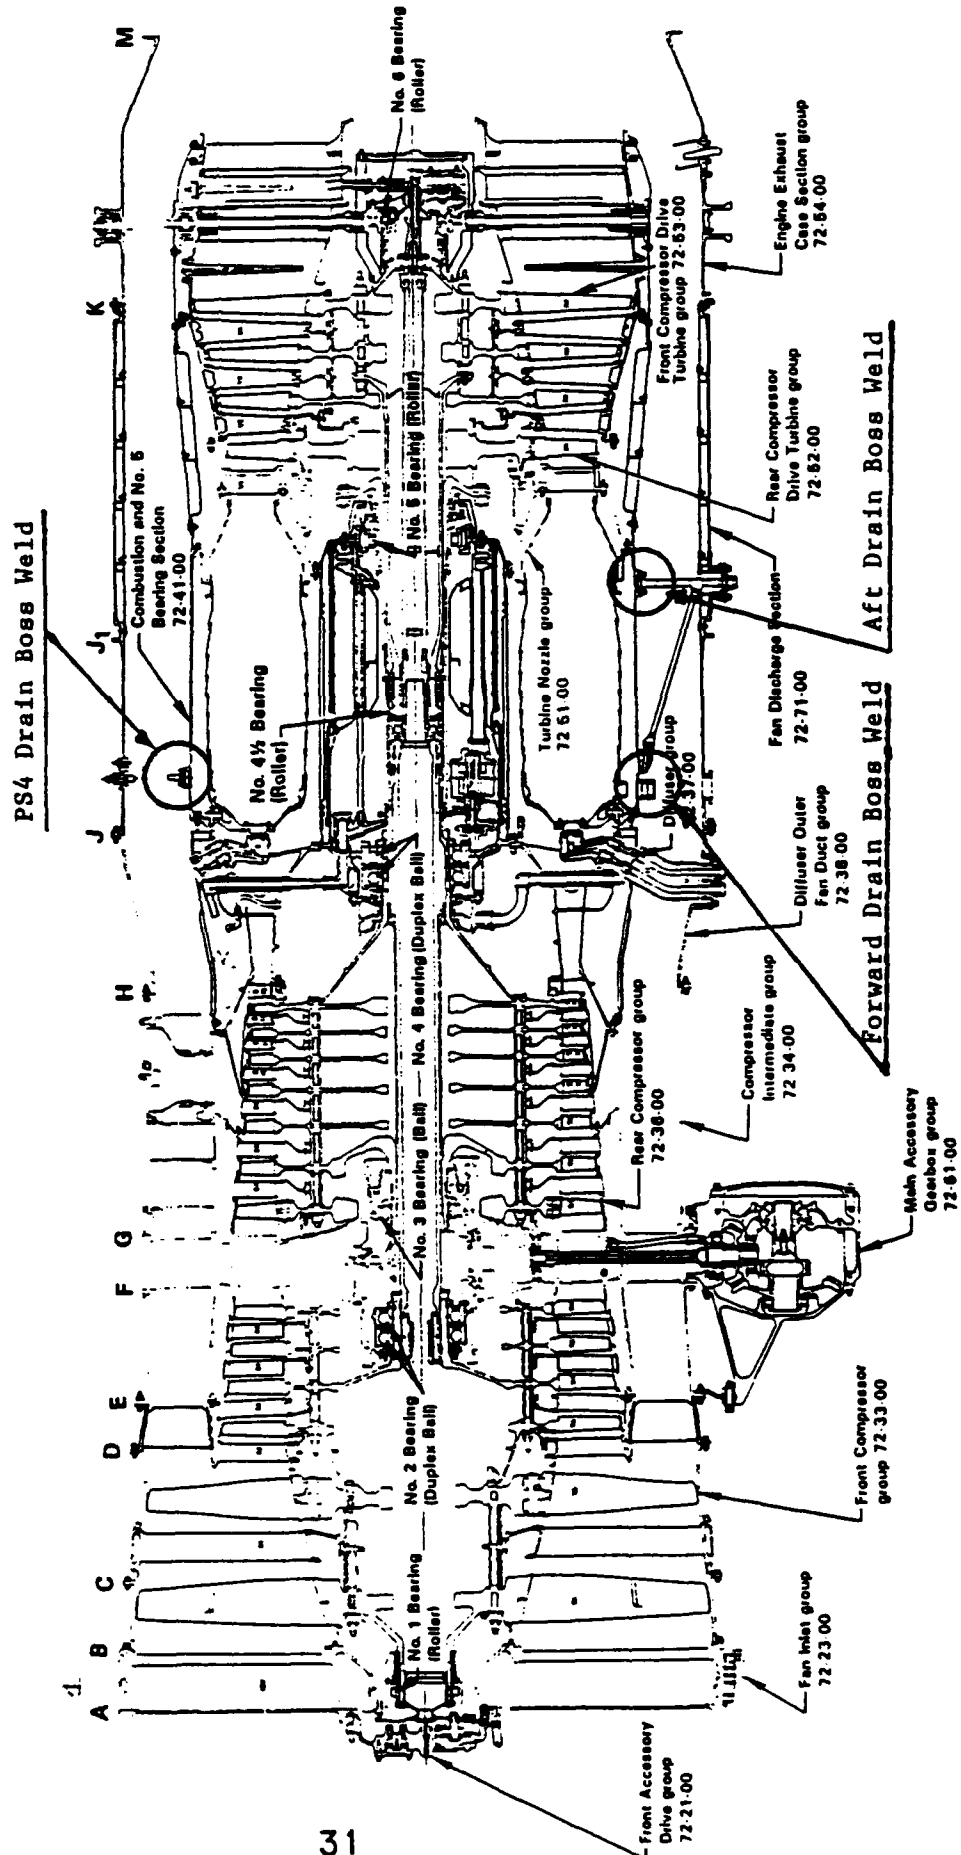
SCHEMATIC OF JT8D ENGINE AND LOCATIONS OF THE DRAIN BOSS WELDS
